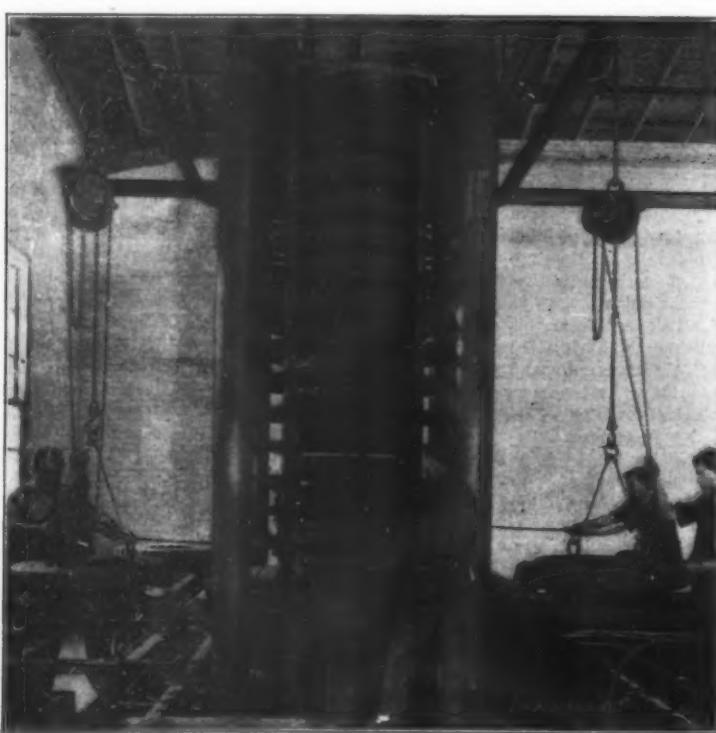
THE VULCANIZING PRESS AND MOLDS.
